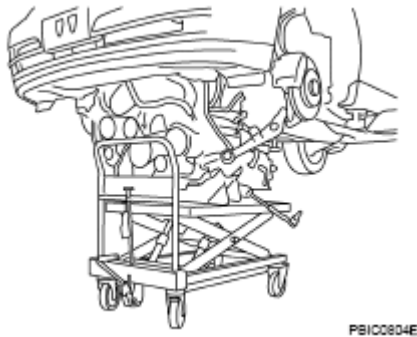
Supporting Bottom Of Suspension And Transmission Assembly
